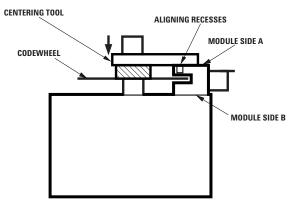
Alignment Tool is Placed over Shaft and onto Codewheel Hub. Alignment Tool Pins Mate with Aligning Recesses on Module.
